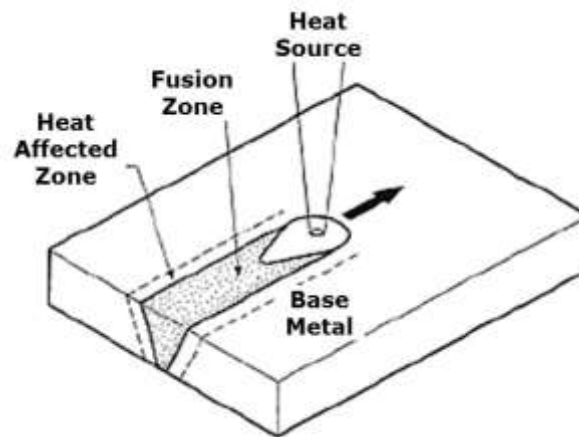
Interaction between heat source and base metal in weldment [6]
